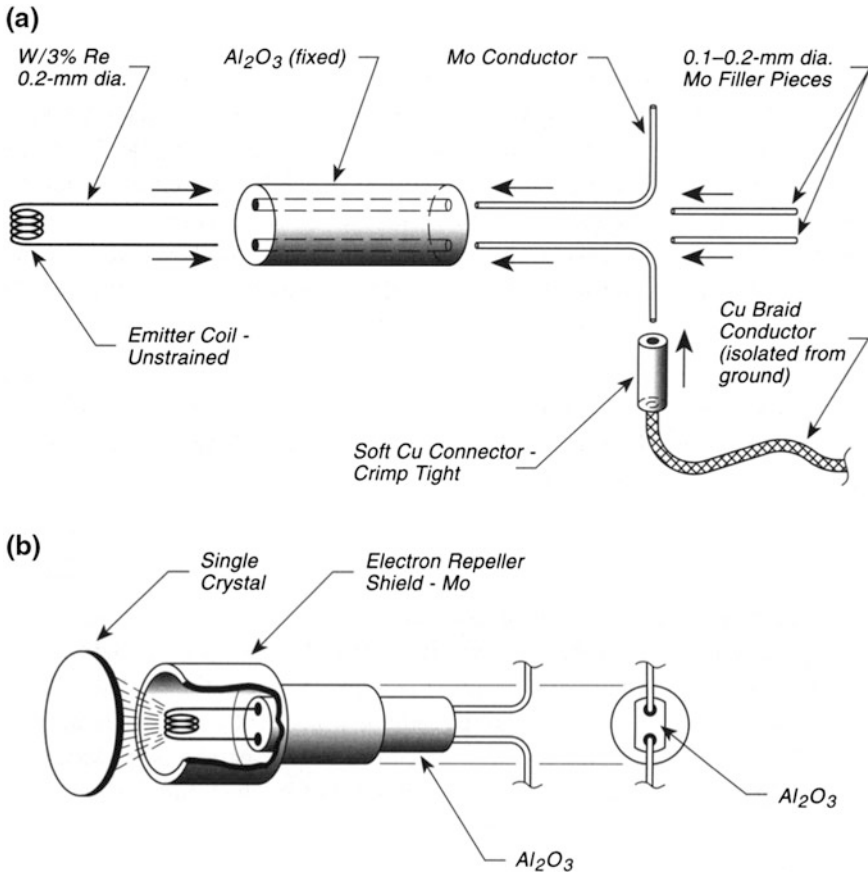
Thermionic emitter mounting. a Open emitter. b Shielded emitter
